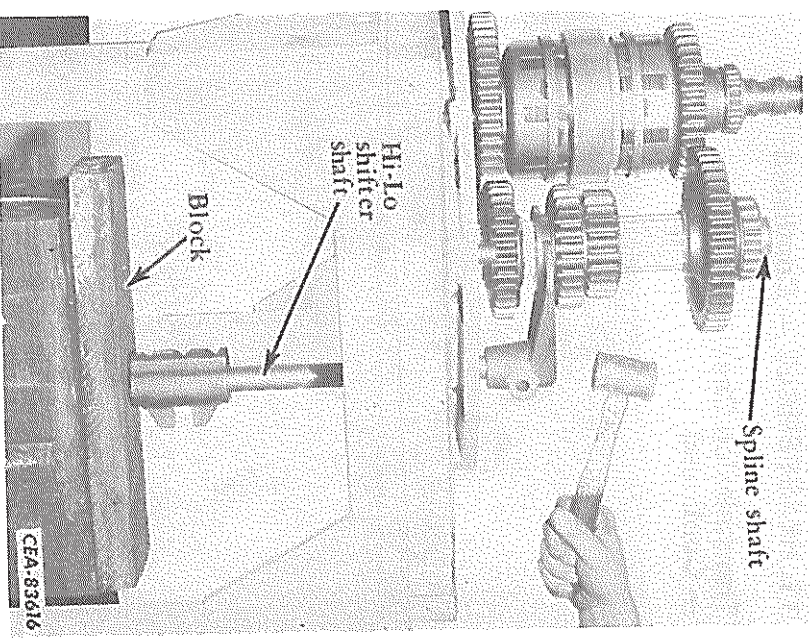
Installing the Hi-Lo Shifter Shaft and Fork
